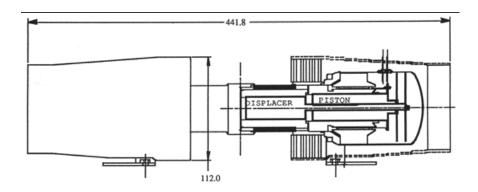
Opposed Free-Piston Stirling Cooler (Dimensions in mm)
